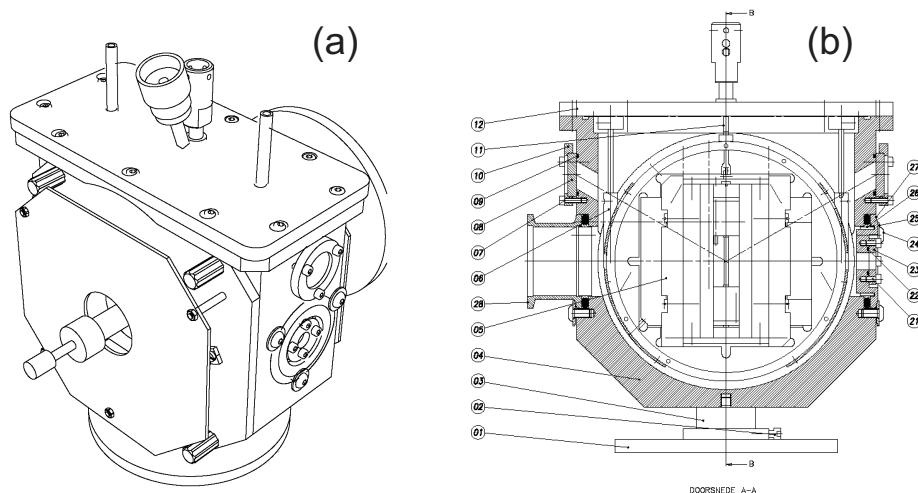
Two-stage oven used in XPCS measurements. (a) Side view. (b) Movable frame mounted inside the oven.
